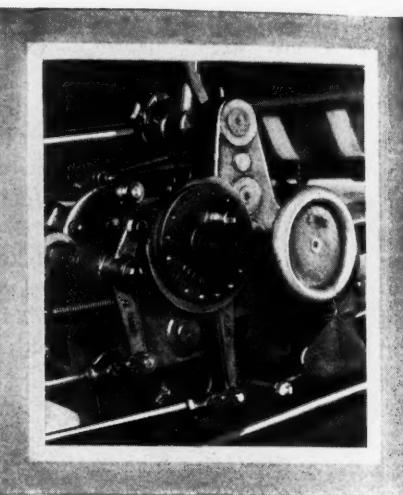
Special Machine which not only Assembles Balls and Springs into Fittings, but Also Cross-drills them and Inserts Locking Pins into the Drilled Holes
